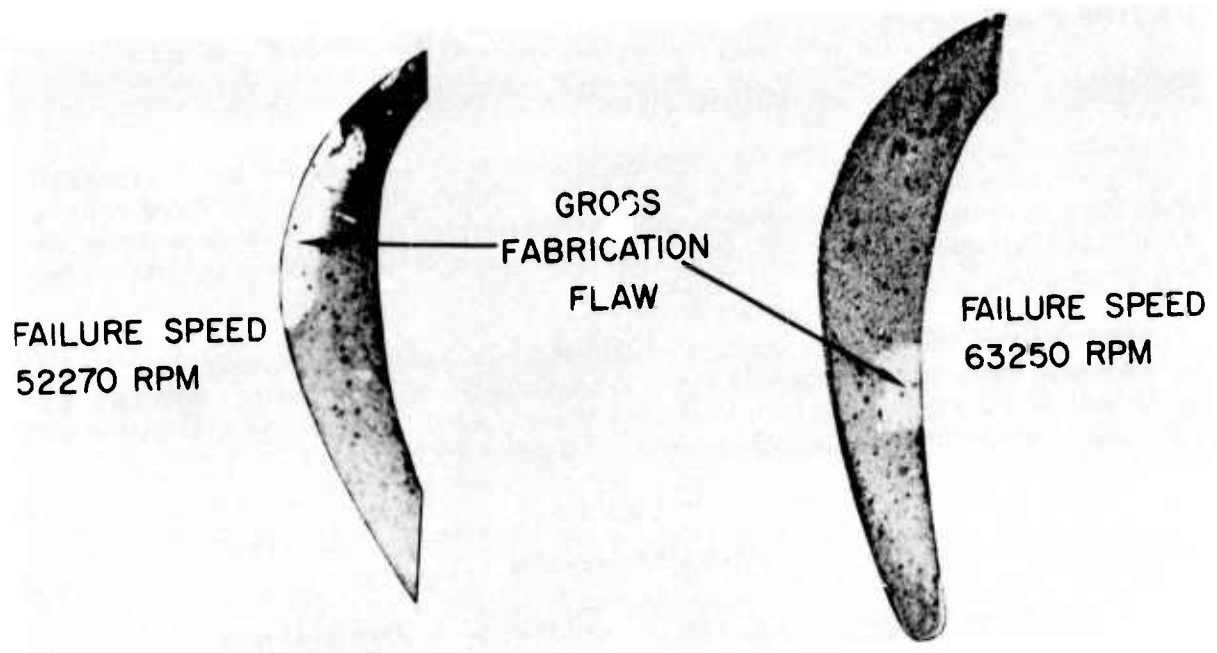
Typical Fracture Surfaces with Gross Fabrication Flaws
